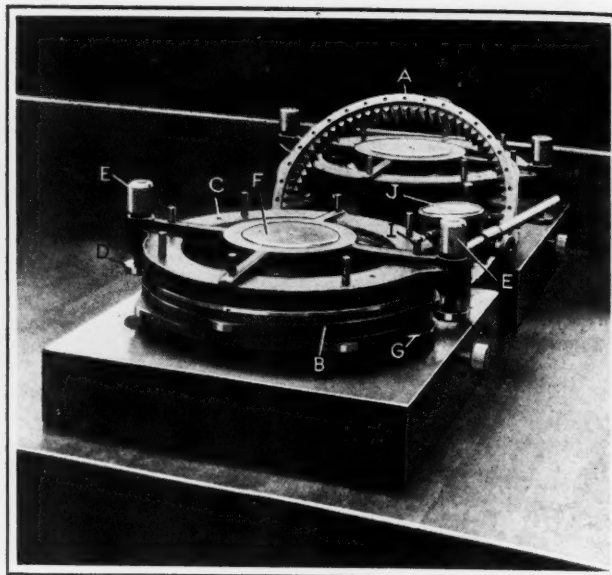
Gaging Fixture Used in Testing Gear Teeth of Cam for Backlash
